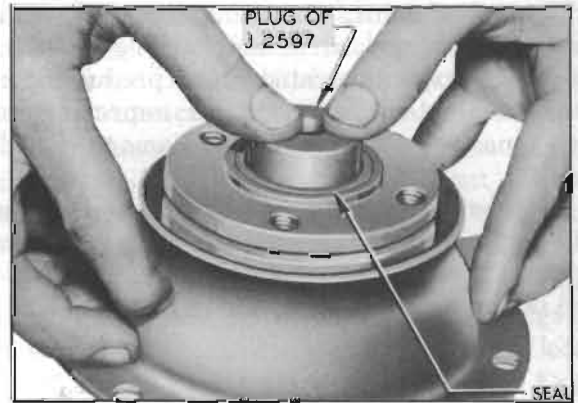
Pushing Installing Tool into Universal Joint Oil Seal
